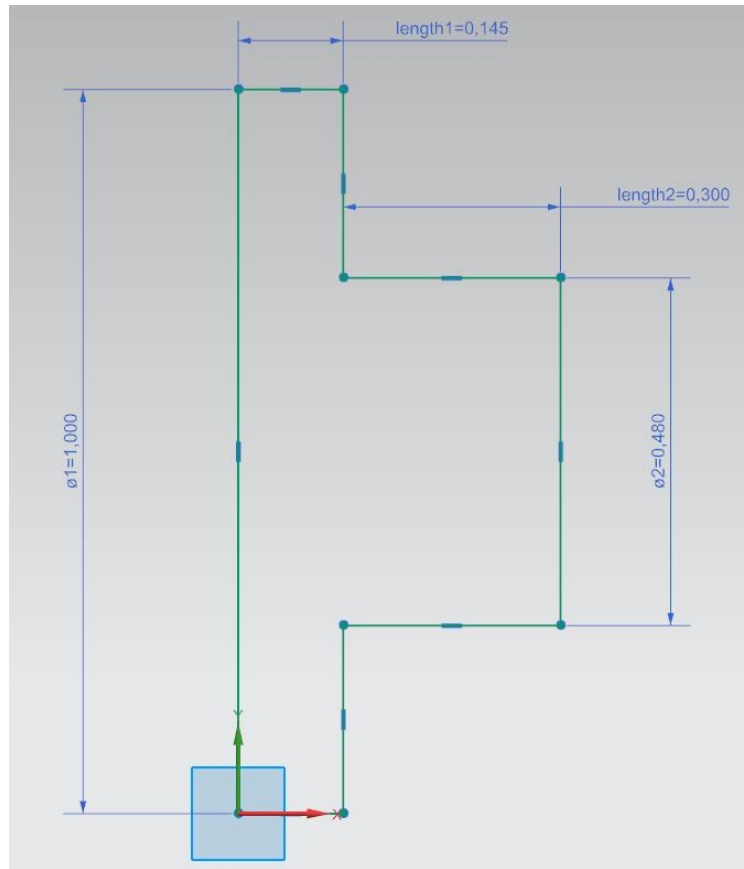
2-D Drawing of the Washer Cap with Dimensions
